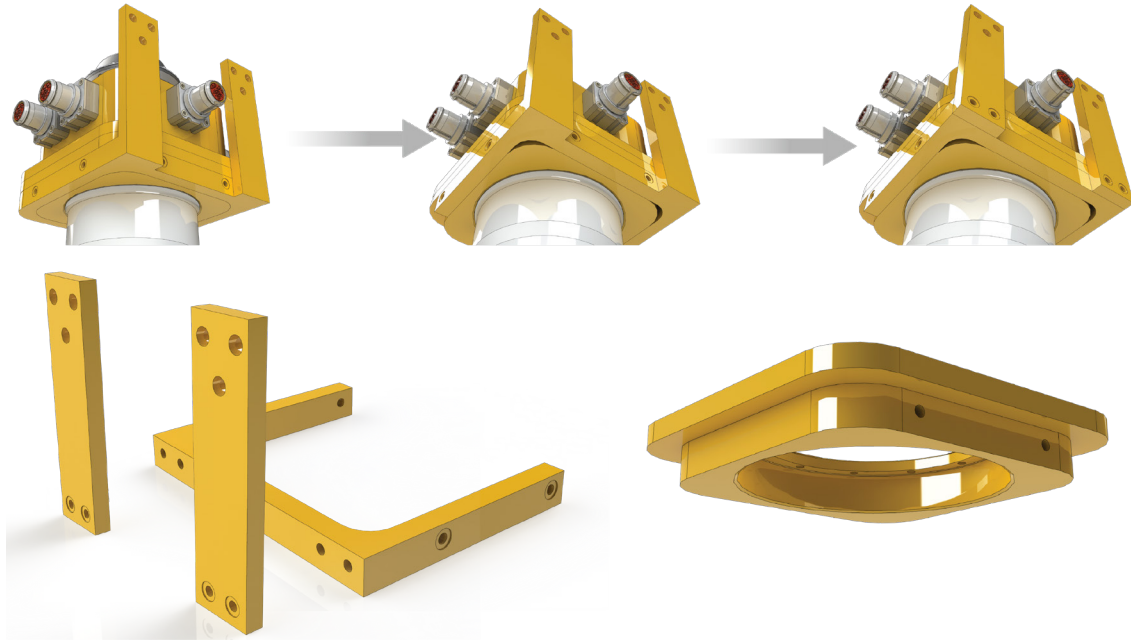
Detailing of horizontal fastening solution (Private picture, 2023)
